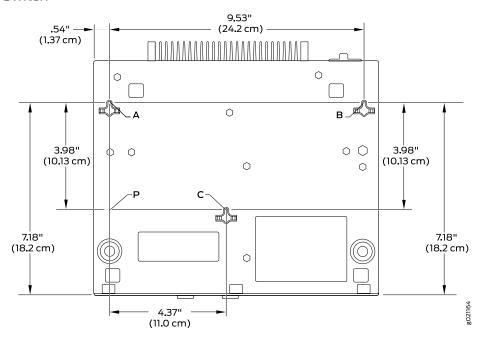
Measurements for Installing Mounting Screws for EX2200-C Switch
